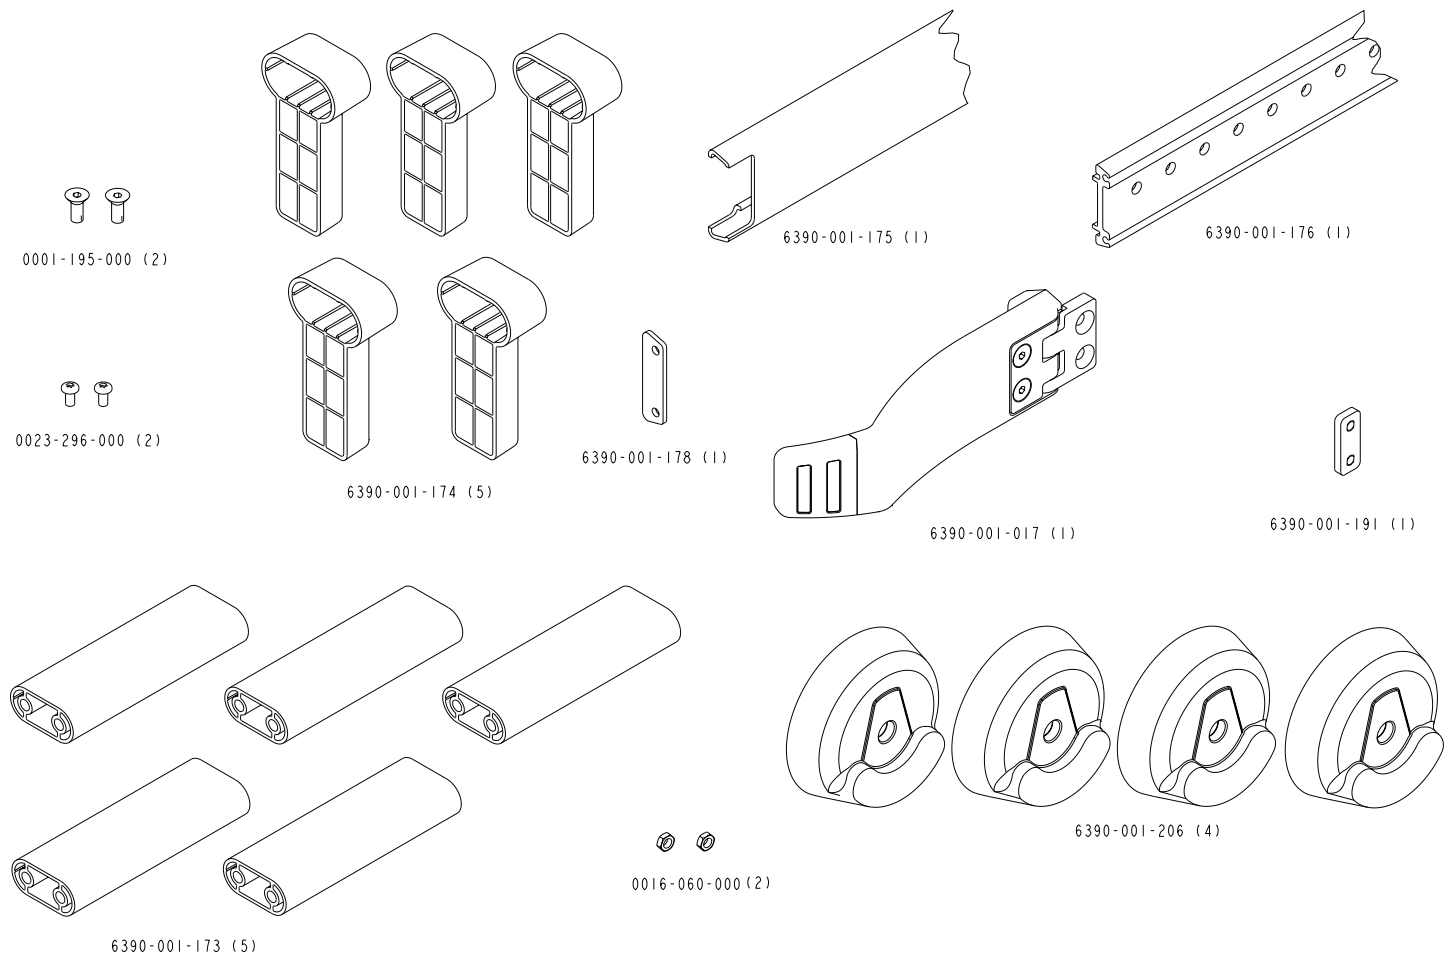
Optional wheel guide assembly installation kit components 6390-027-000
